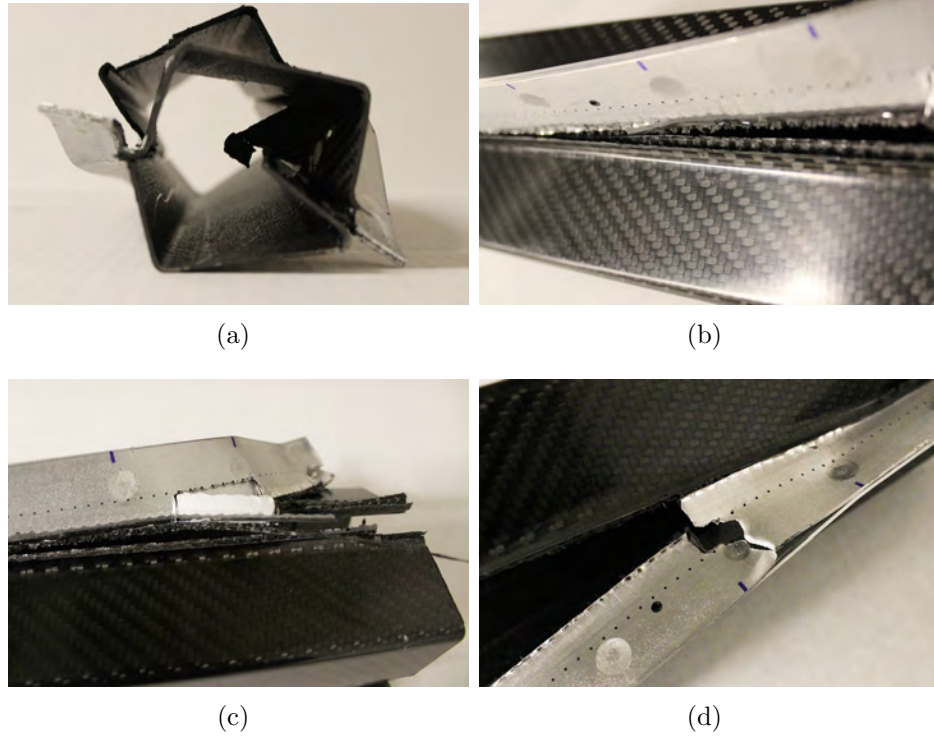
Failure modes in UAM samples: (a) CFRP hat breaking; (b) CFRP tow shearing; (c) AA matrix breaking; (d) AA flange breaking (RSW plug fracture).
